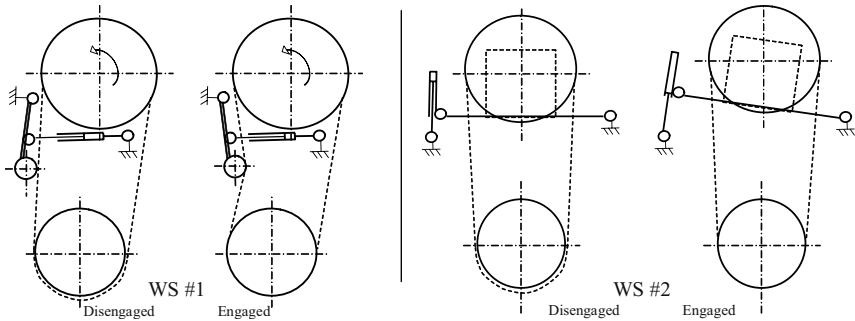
The two selected working structures (WS), in disengaged and engaged positions
